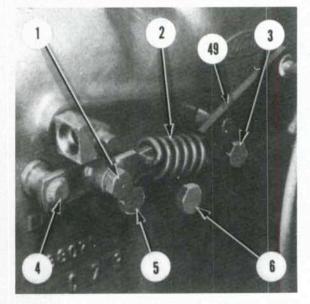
View of pto shift mechanism located on left side of rear axle center housing.
